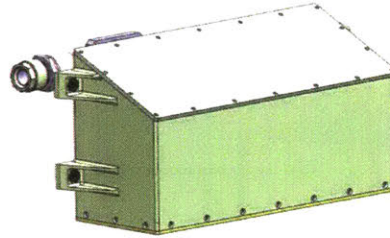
Inlet HEPA filter assembly. Credit: JPL
